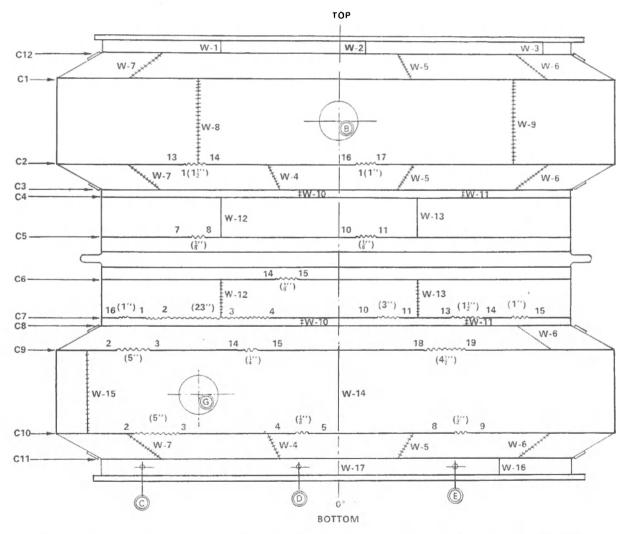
Developed Layout of weld joints on Solution Reboiler showing cracks on outside surface.
